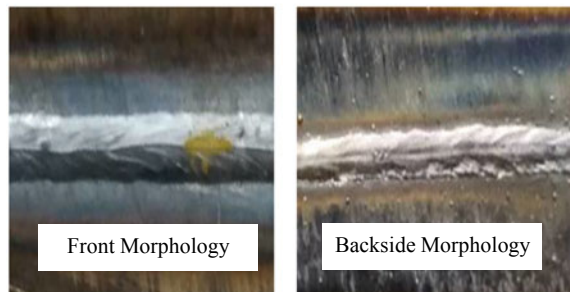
Weld morphology of 4 mm thick and low carbon steel plate
